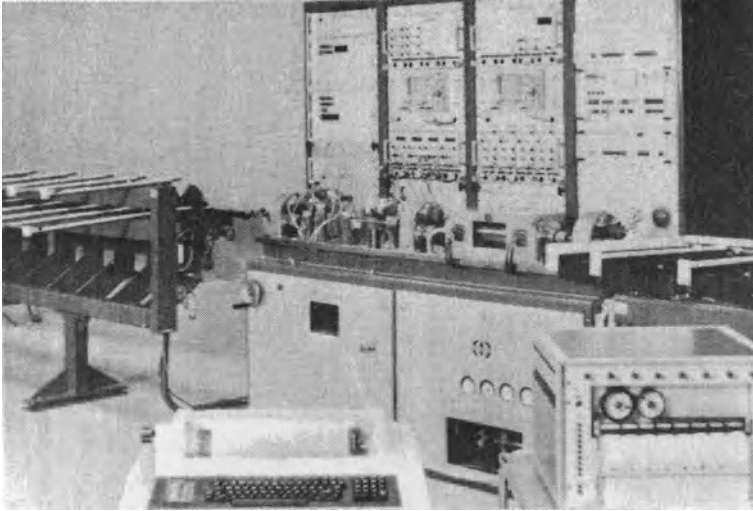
Rotating probe installation for nuclear-fuel canning tubes (Type ROTA25, design Nukem, Hanau)
